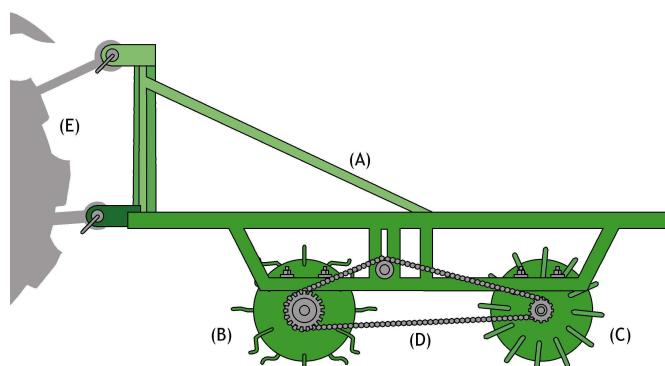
Scheme of the rolling harrow: (A) frame; (B) front axle equipped with spike discs; (C) rear axle equipped with gage rolls; (D) chain drive; (E) three points linkage.
